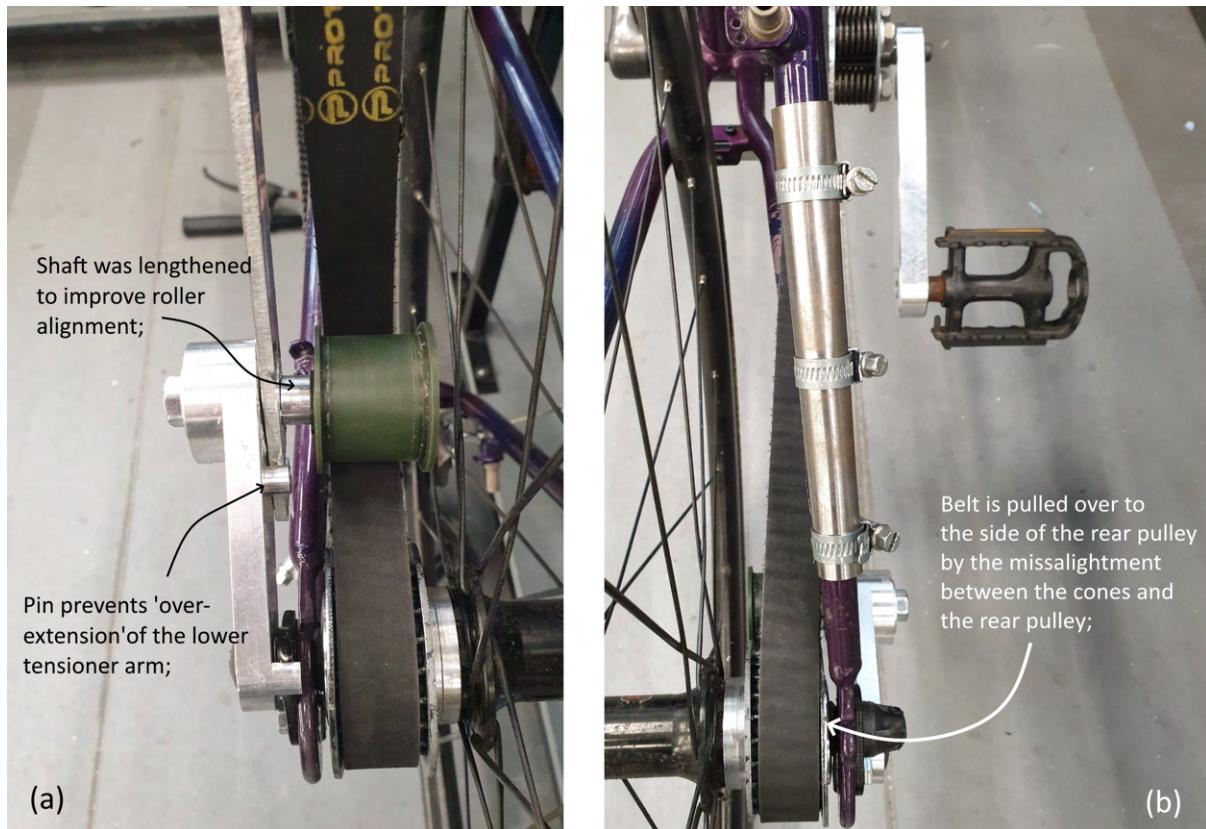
(a) Modification to the rear tensioner assembly; (b) Illustration of the misalignment between the cones and the rear pulley;
